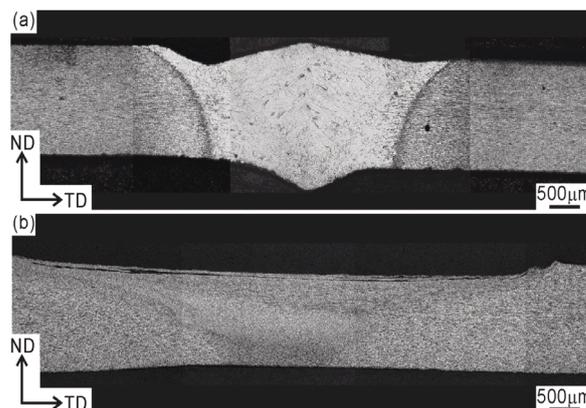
Optical micrographs of the transverse sections of the welded zone in the TWIP steel. (a) TIG welding and (b) FS welding..
